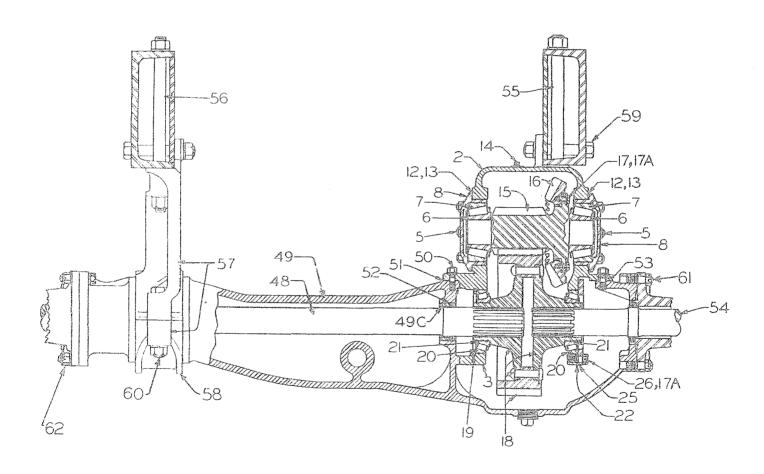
Rear Axle Gear and Pinion Carrier (Machines H-100 to H-4668 inclusive)
